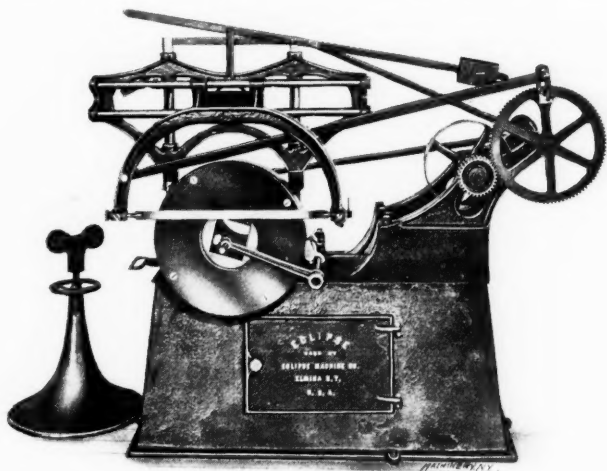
The Eclipse Machine Co.'s Power Hack-saw.
